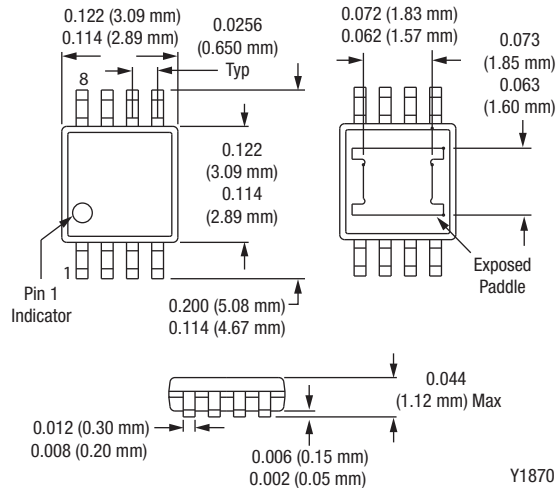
MSOP-8 Exposed Pad Package Dimension Drawing
